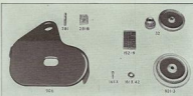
Parts of Metric Transposing Std. Change Gear Equip't.
